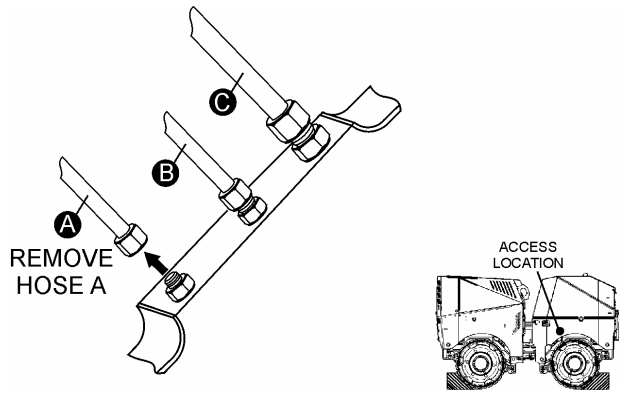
Hydraulic Hose A Removal (Rear Stop Bumper Side)
